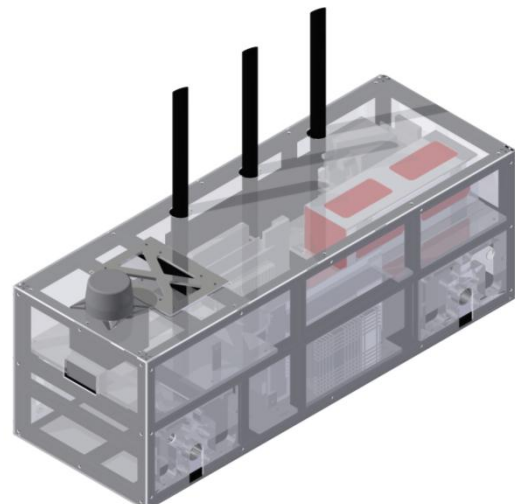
Final Chassis Design with Internal Components and Shell - Rendered CAD Image
